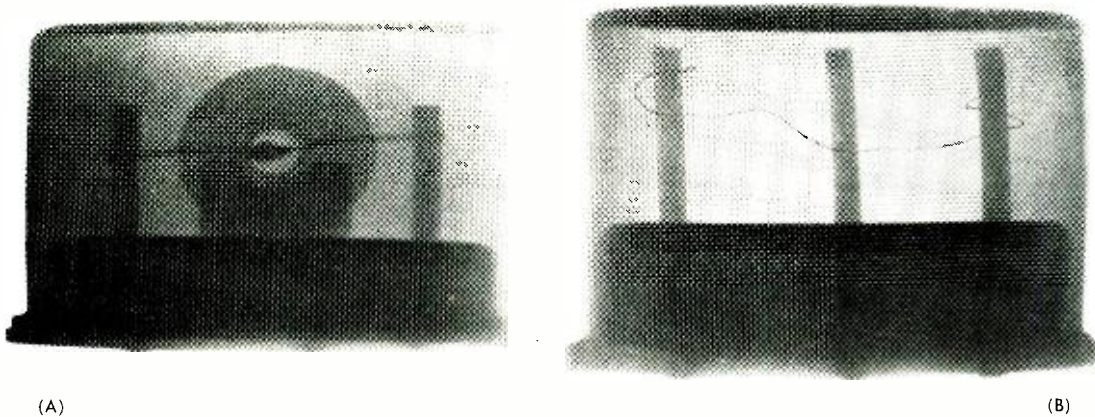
(A) Fluoroscopic image of a good transistor. (B) A gold wire, .0007-in. diameter, is clearly visible through its metal container.
